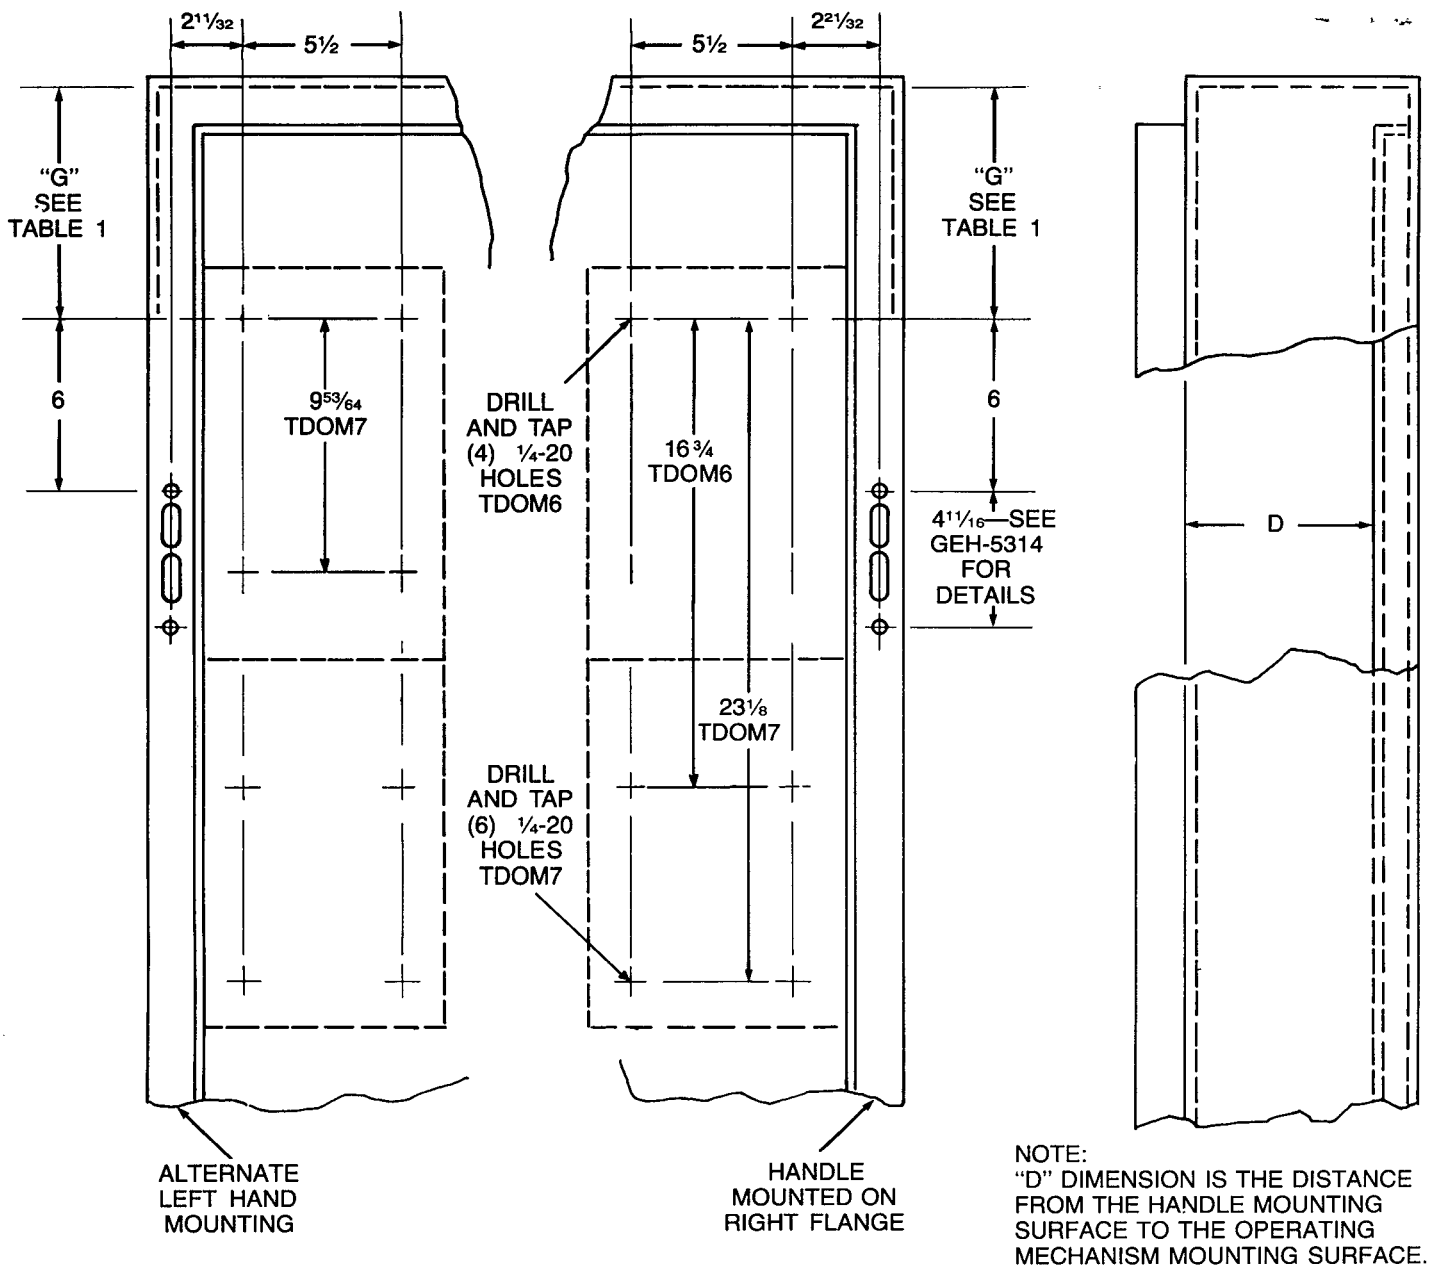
Customer sub-panel layout and drilling for left or right mounting.
